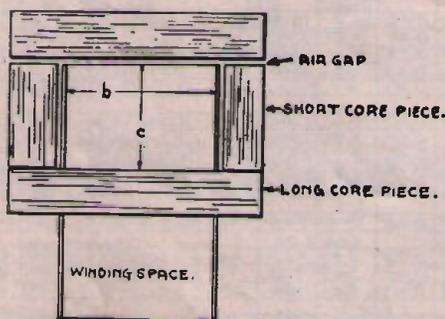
CORE ARRANGEMENT FOR FILTER CHOKE COILS
